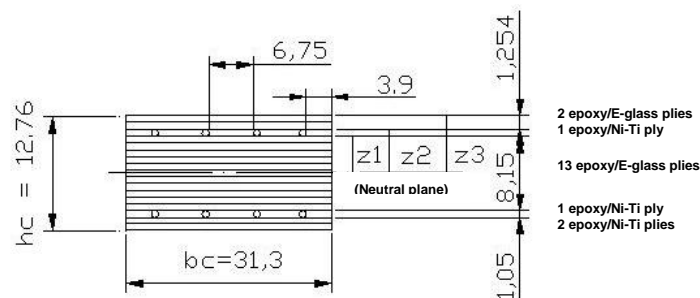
Cross-section view of the SMAHC beam (dimensions in mm).
